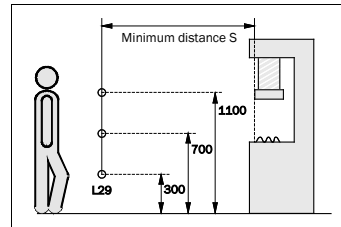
Access protection with L29 single-beam photoelectric safety switch
